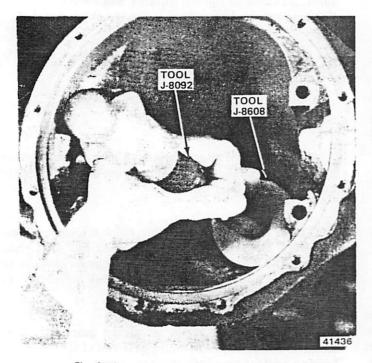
F-37 Pinion Rear Bearing Cup Installation
